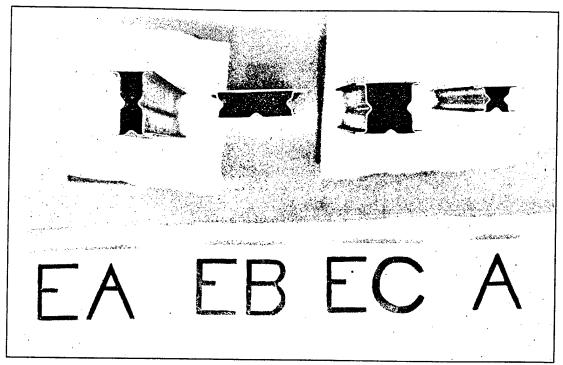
Typical EA, EB, EC, and A Series Stiffener Sections.
